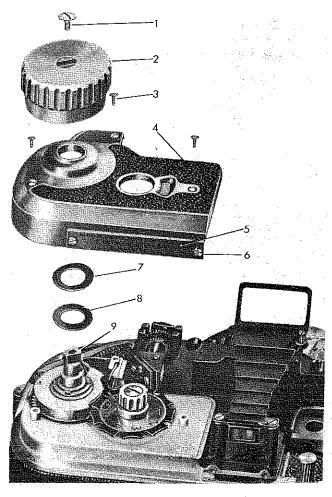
Counter Dial Housing Complete, Exploded from Camera
